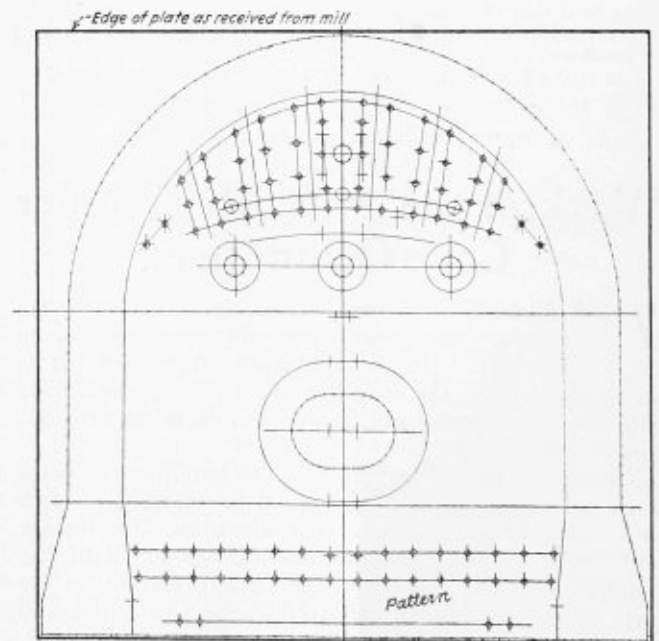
Backhead plate layout, ready for marking the location of the staybolt holes from the firebox back sheet
